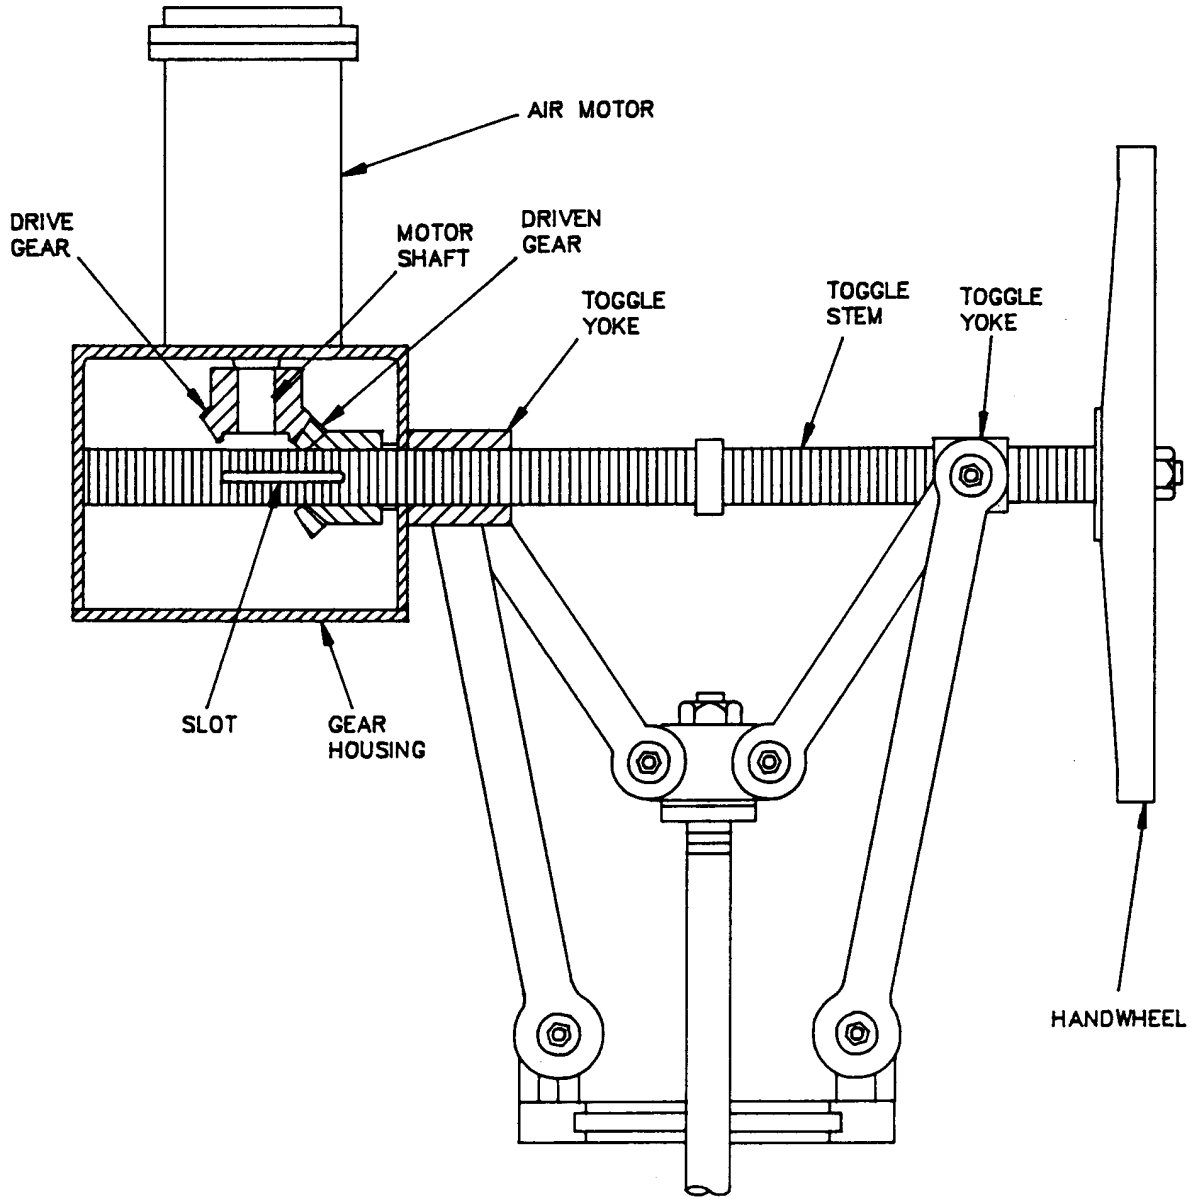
Air Motor-Driven Toggle Assembly (Typical)
